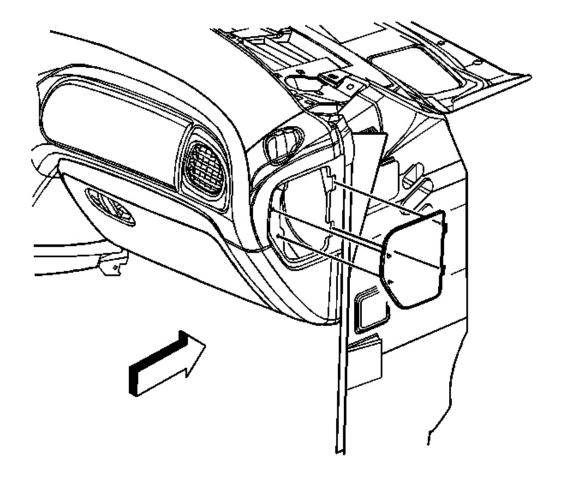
Identifying Right I/P Access Cover Courtesy of GENERAL MOTORS CORP.
